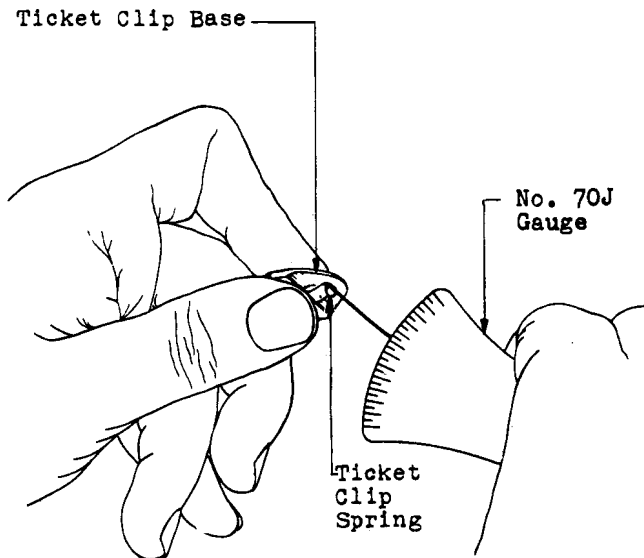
Method of Checking Tension of Ticket Clip Spring
